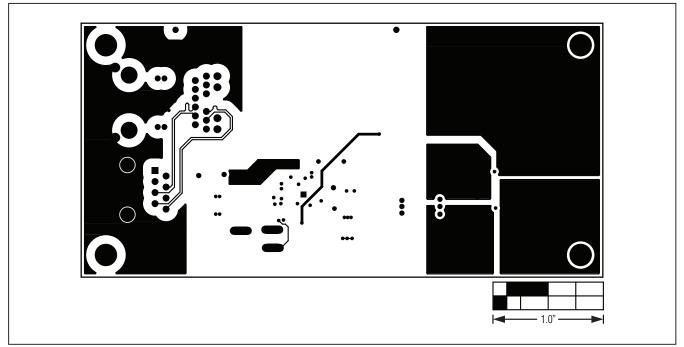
MAX5974A EV Kit PCB Layout—Signal Layer 3
